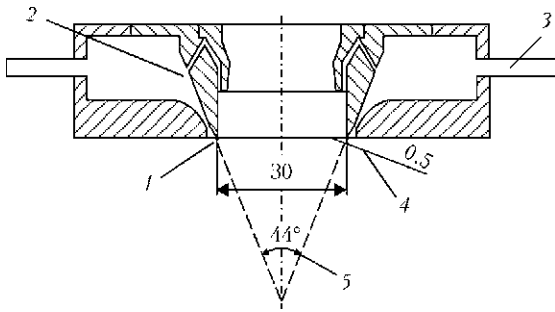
Scheme of designed nozzle: 1 – nozzle inner diameter; 2 – ventilation hole; 3 – gas inlet; 4 – throat wide; 5 – apex angle
